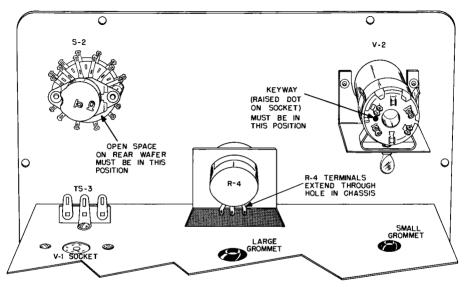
HOW TO MOUNT THE PARTS ON THE FRONT PANEL
